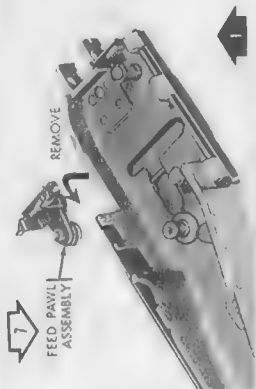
Disassembly/assembly of cover assembly (sheet 1 of 2).
